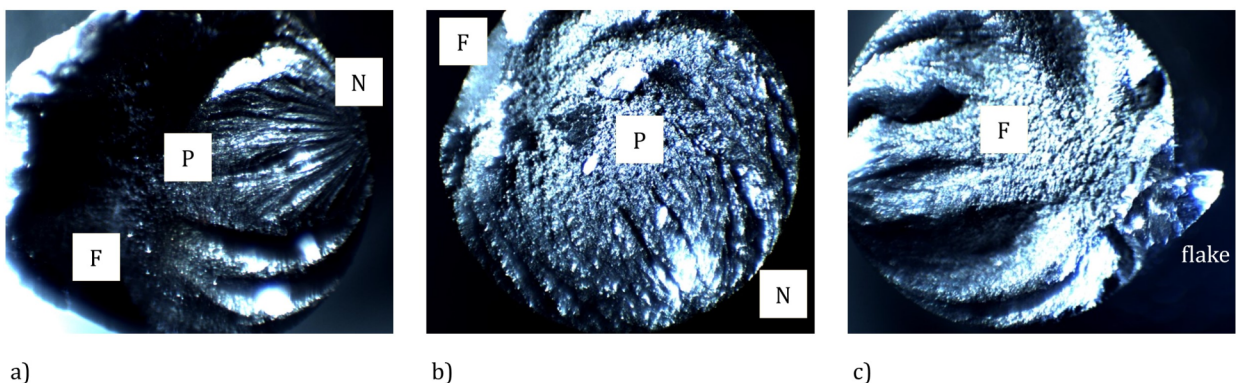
Fracture surfaces of specimens u1, d8 and d1. Figure adapted from [63, 70-72].
